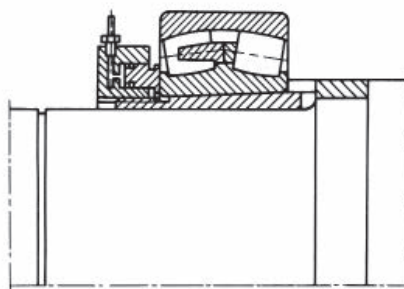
Bearing mounting on a withdrawal sleeve using hydraulic nut
